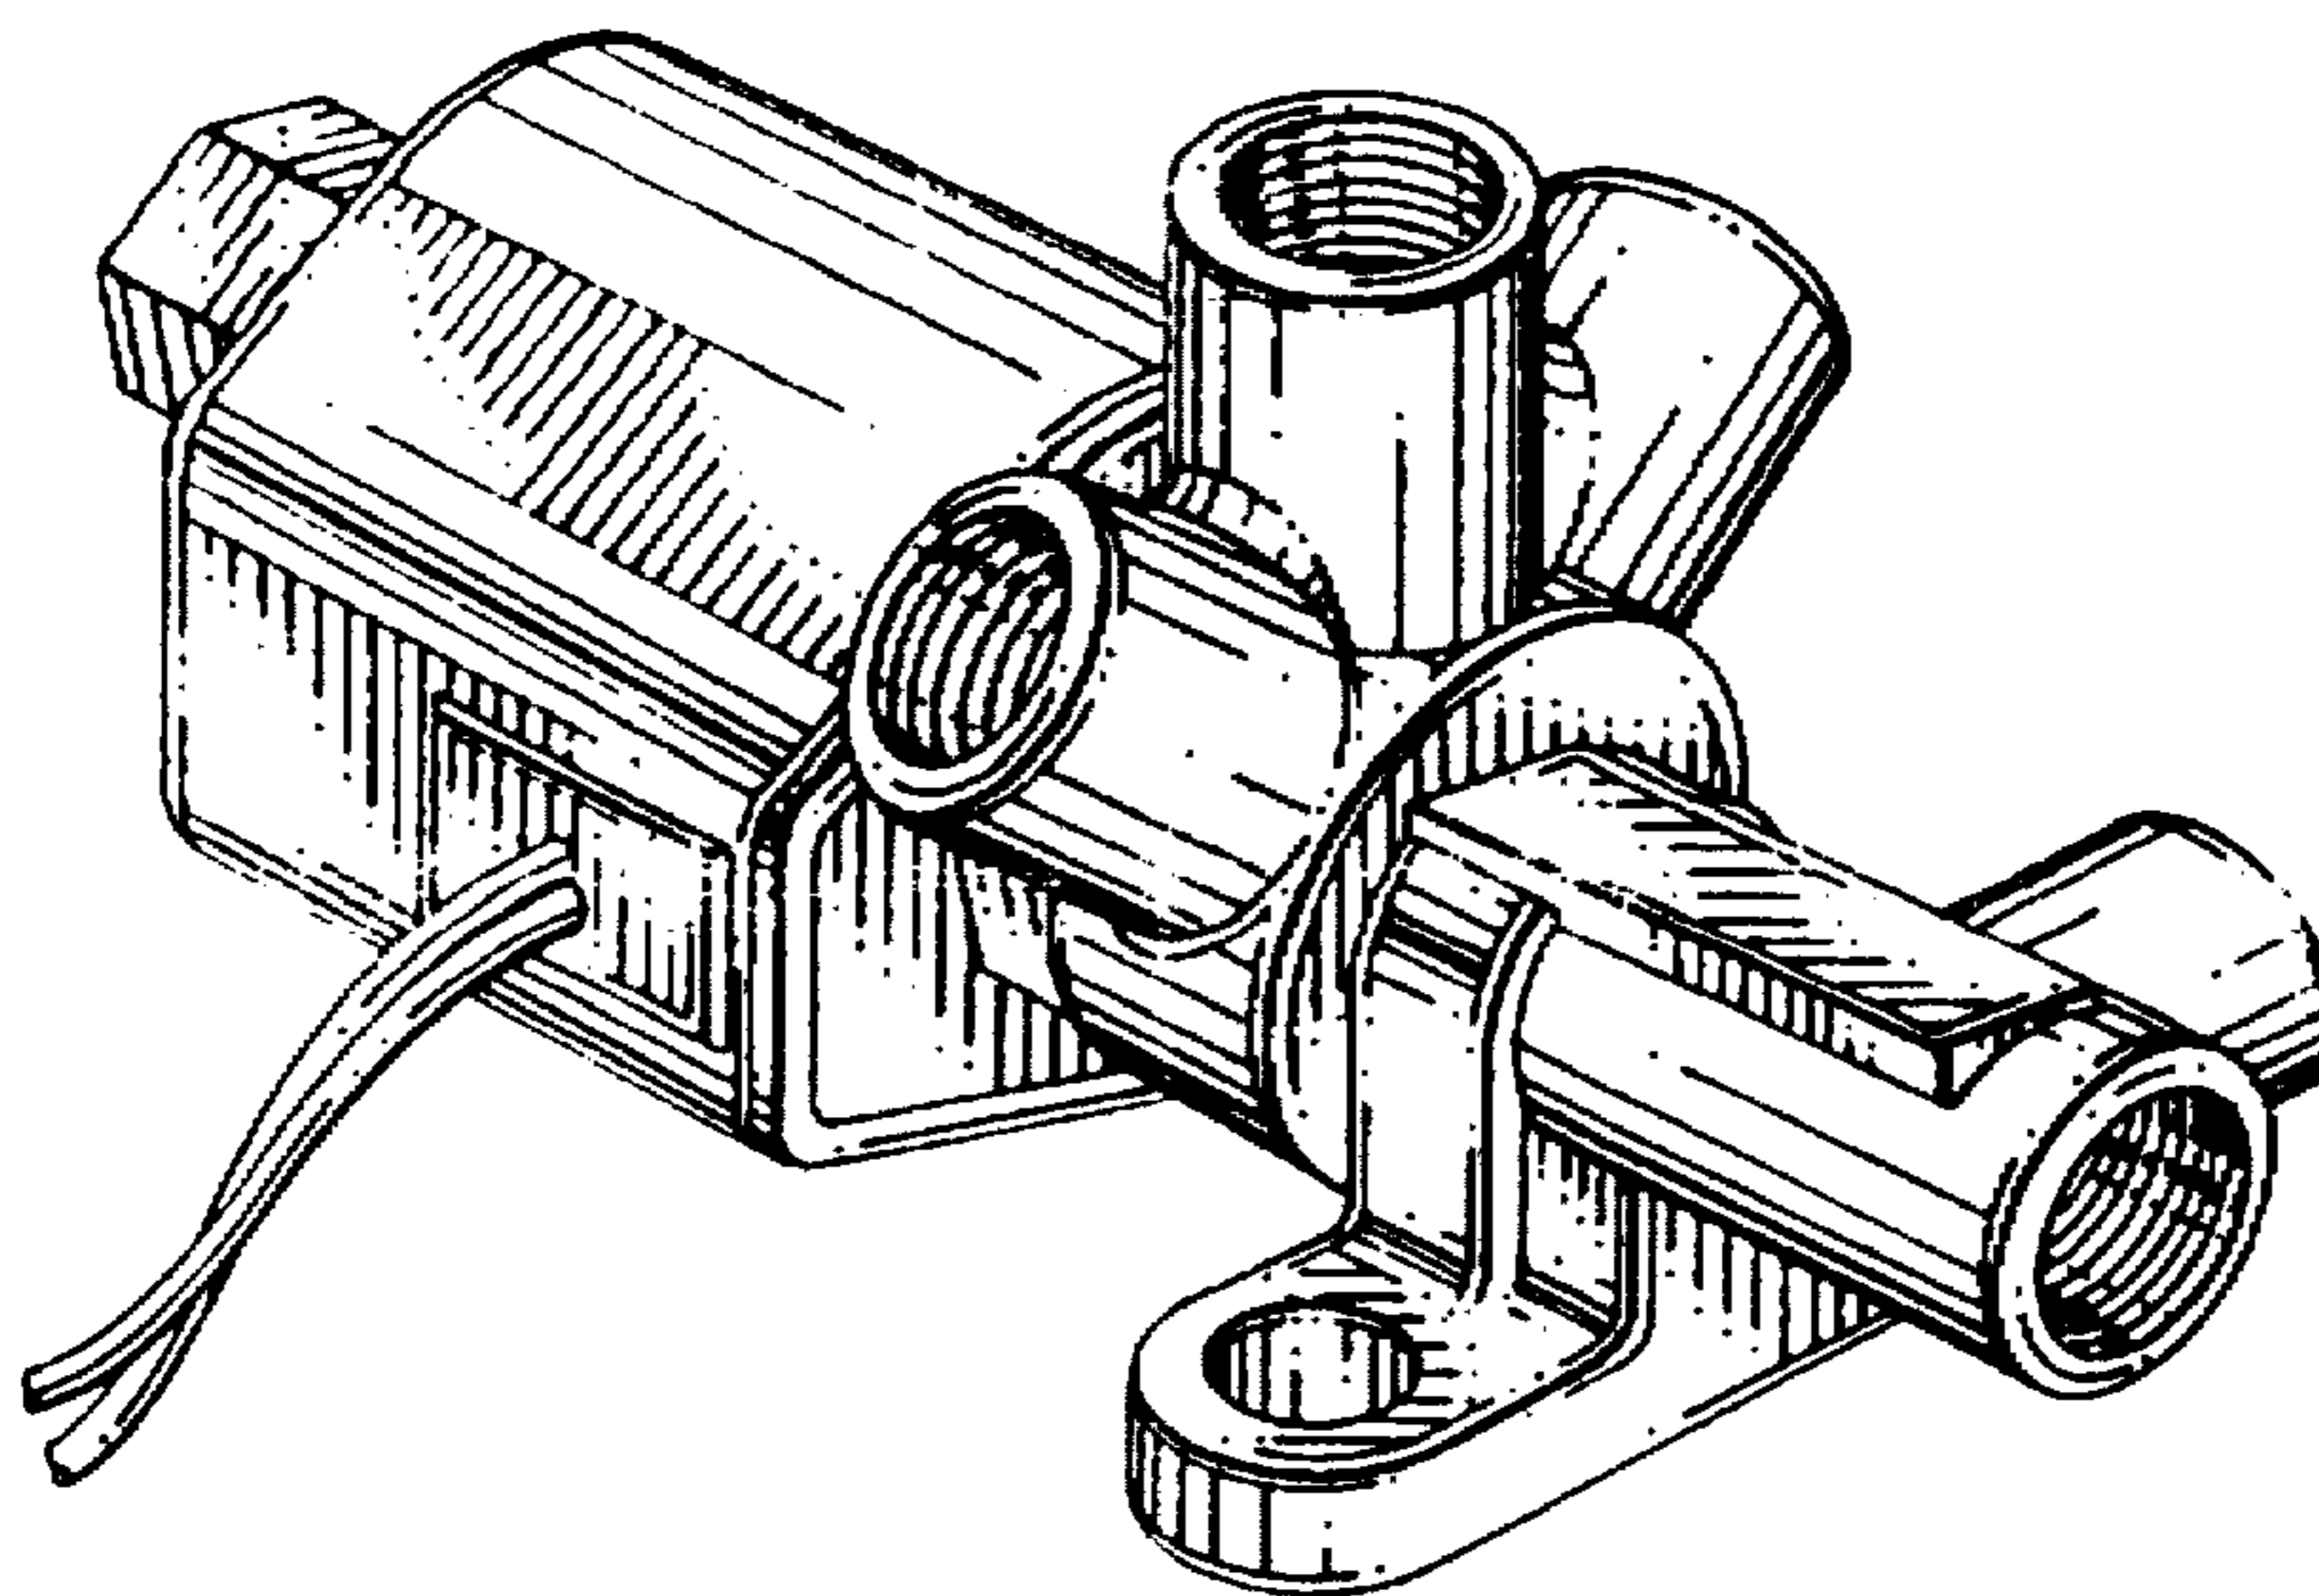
is a perspective view of a combined hydraulic brake and line locking unit showing my new design;
